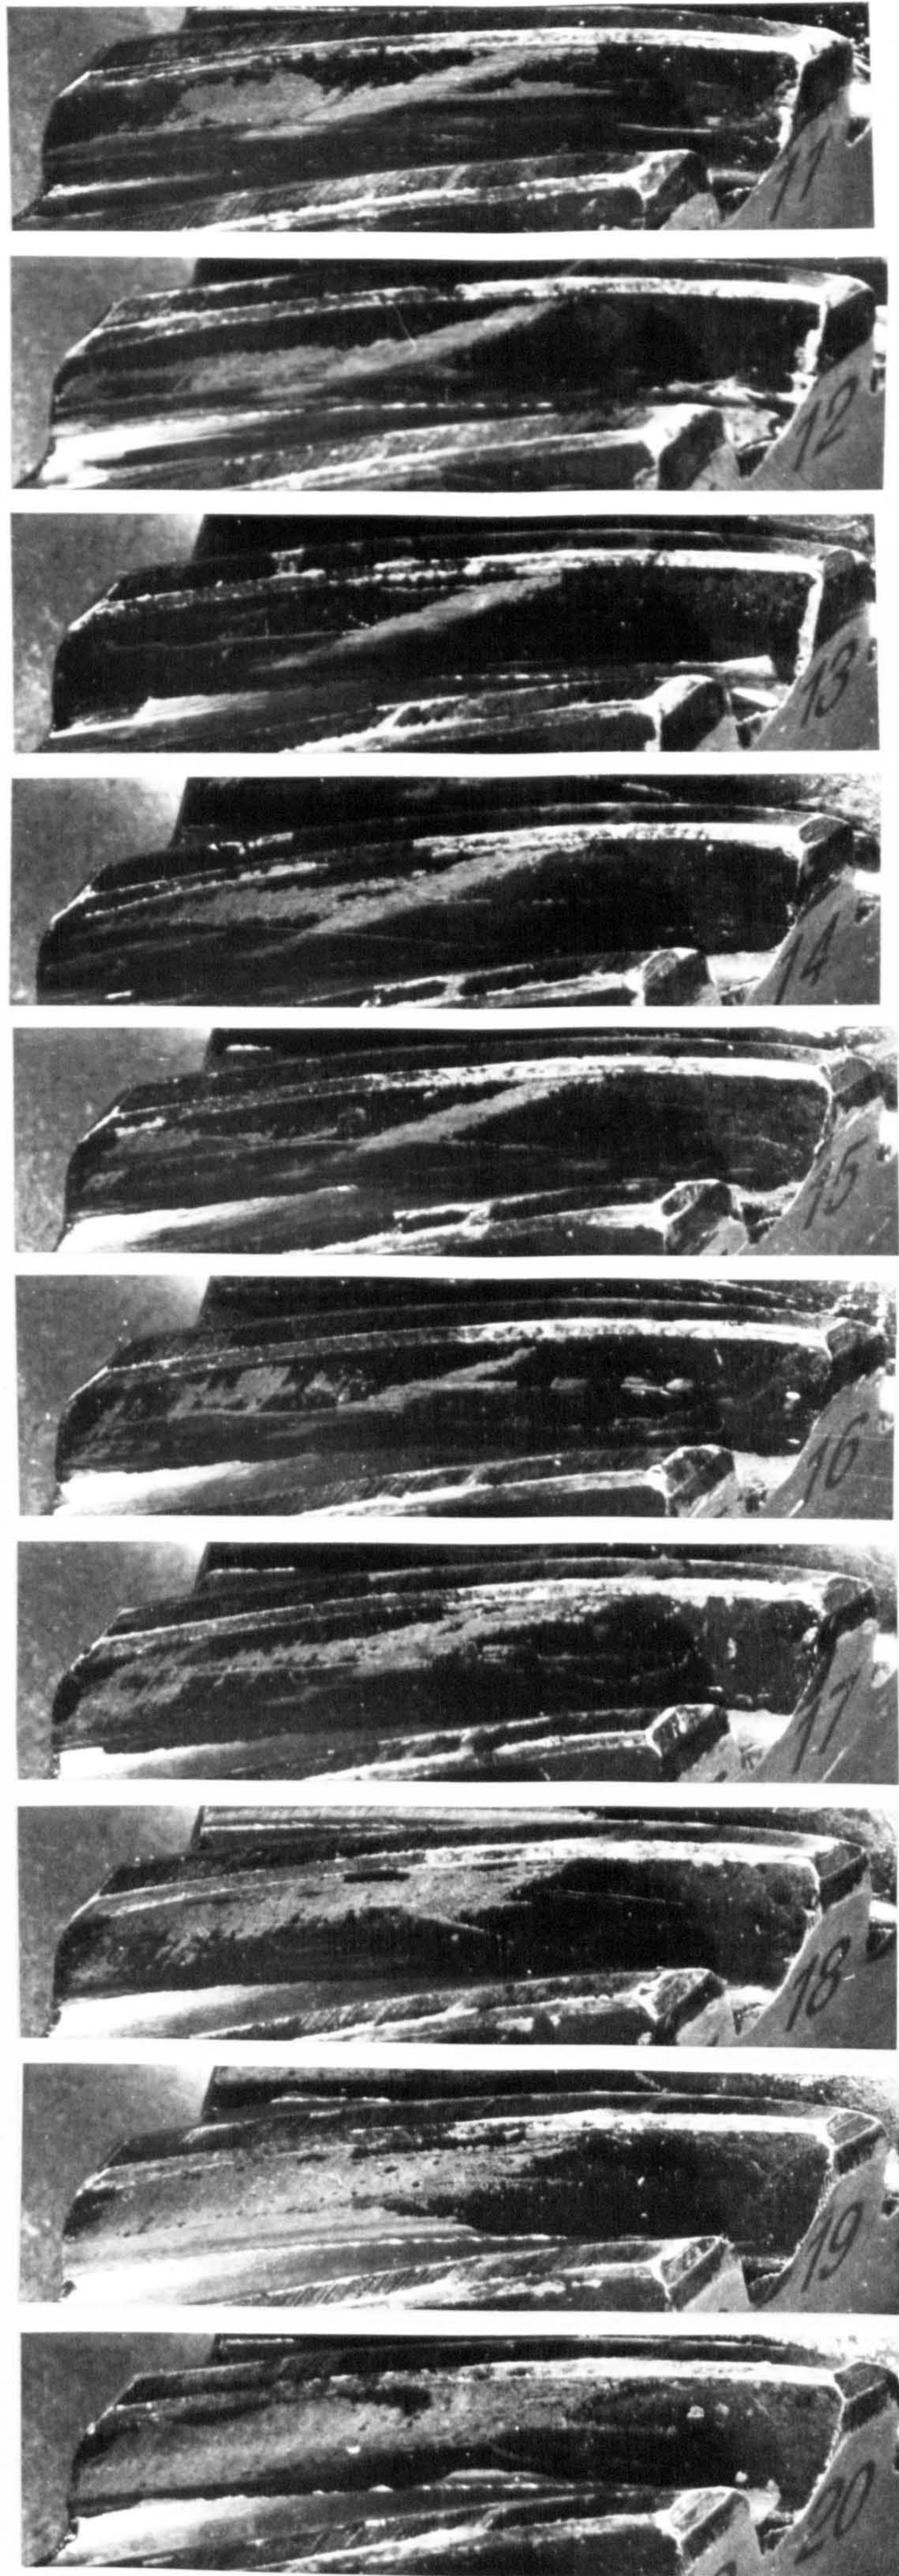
(b) Front Tooth Faces, numbers 11 - 20
